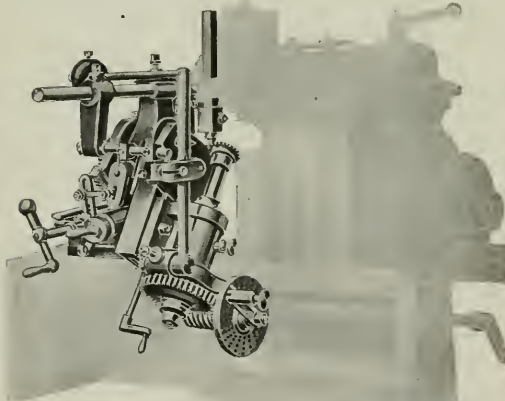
Attachment for Finishing Bevel Gear Teeth in the Shaper by the Templet Process.
